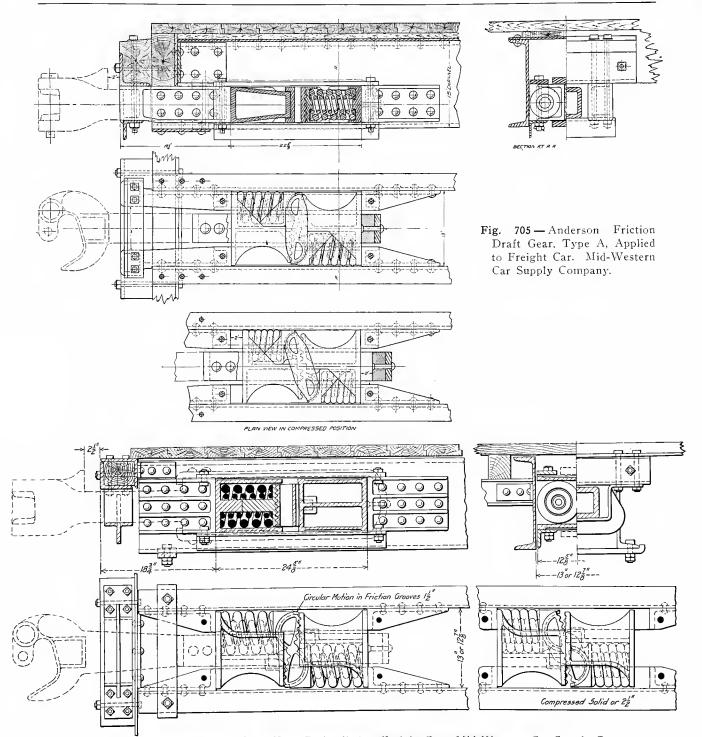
Anderson Friction Draft Gear, Type B, Applied to Freight Car. Mid-Western Car Supply Company.
